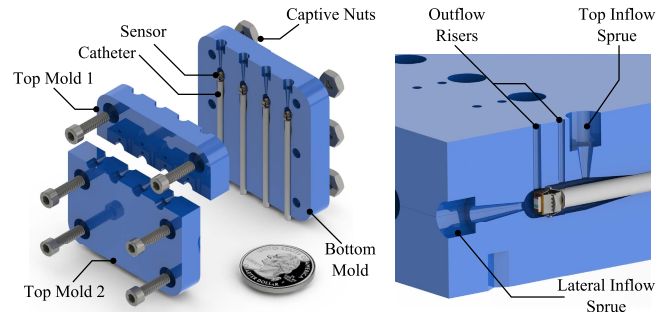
Mold detail for sensor encapsulation and integration onto a 2mm (6 French) catheter.
